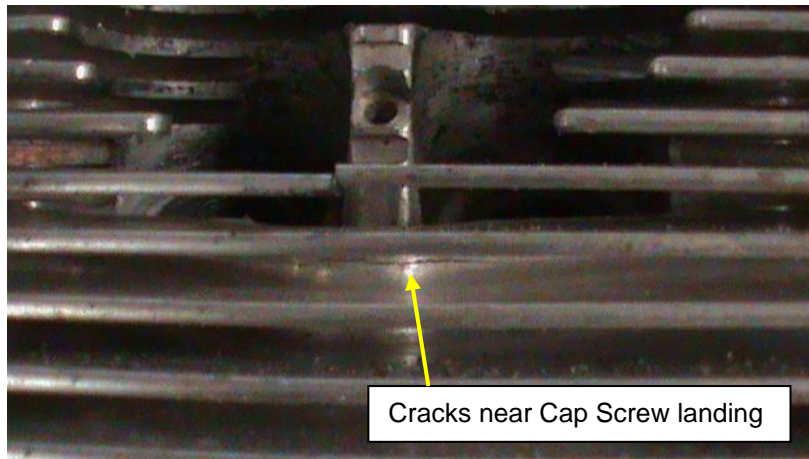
Cracks in Cylinder Head near Cap Screw landing
